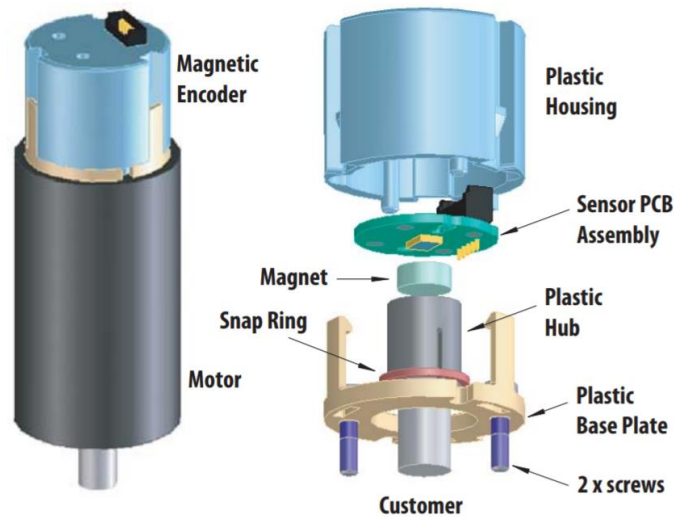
Avago AEAT-6010 Encoder Assembly Diagram [112].
